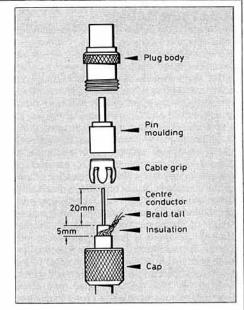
Exploded view of the Antiference coaxial plug type TVP2.
